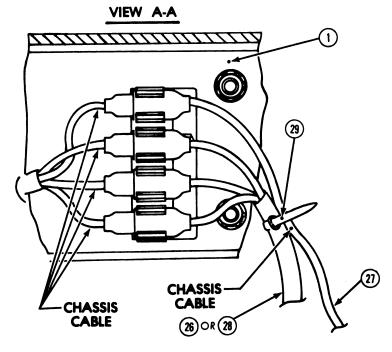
Trailer, Side, Top and Rear Views (Sheet 3 of 3)
